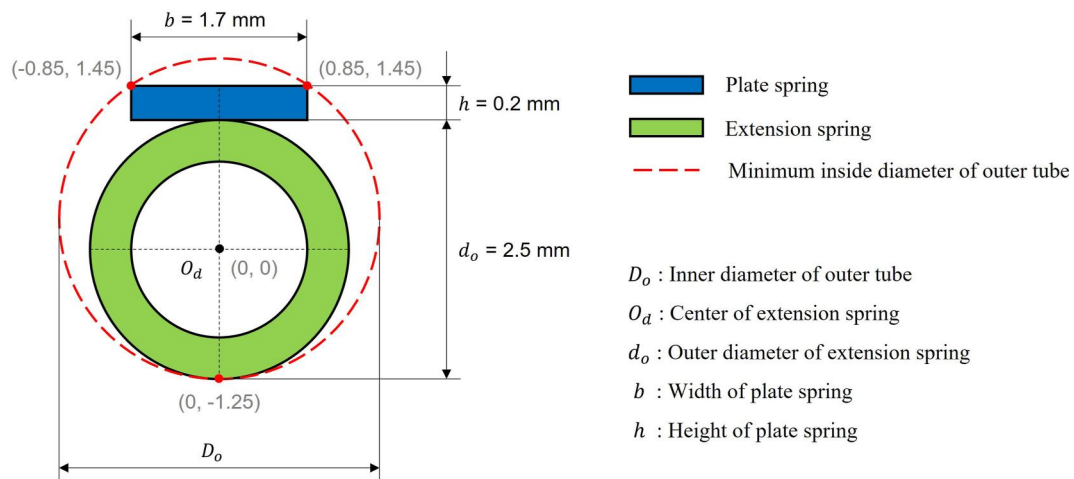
Cross section of the double-spring pre-curved cannula. A two-dimensional coordinate representation is used to calculate the inner diameter of the outer tube
